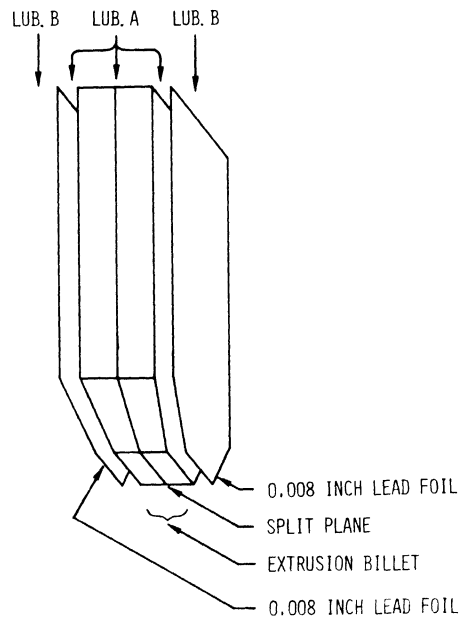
Lubrication for extrusion billet. The billet surfaces adjacent to the die walls were coated with lubricant A.
